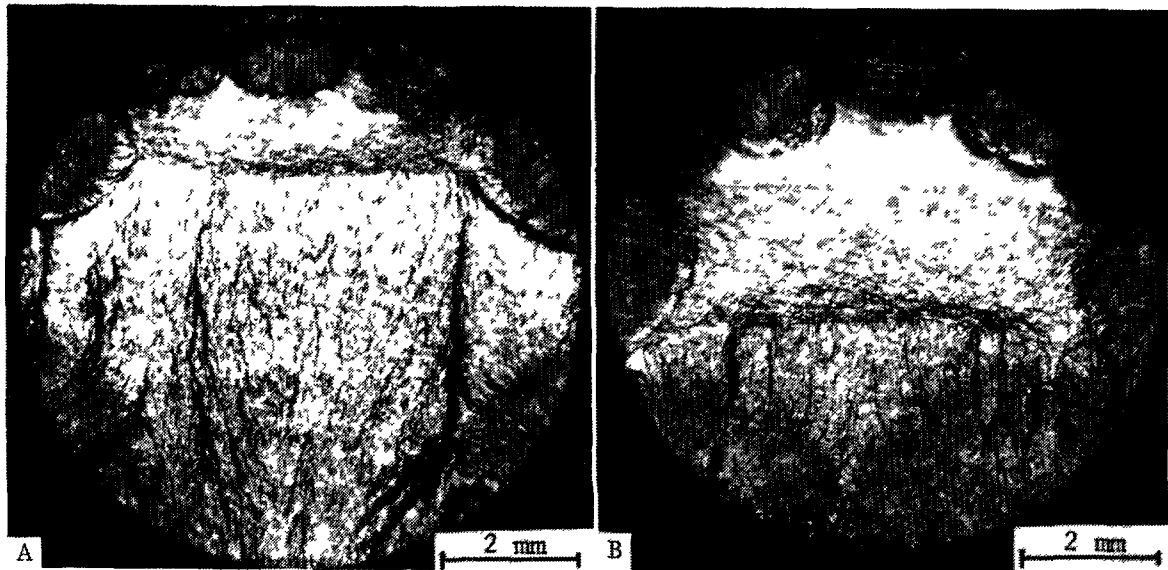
A. Fractography of a fatigue crack initiated from only one melt layer in stainless steel.
